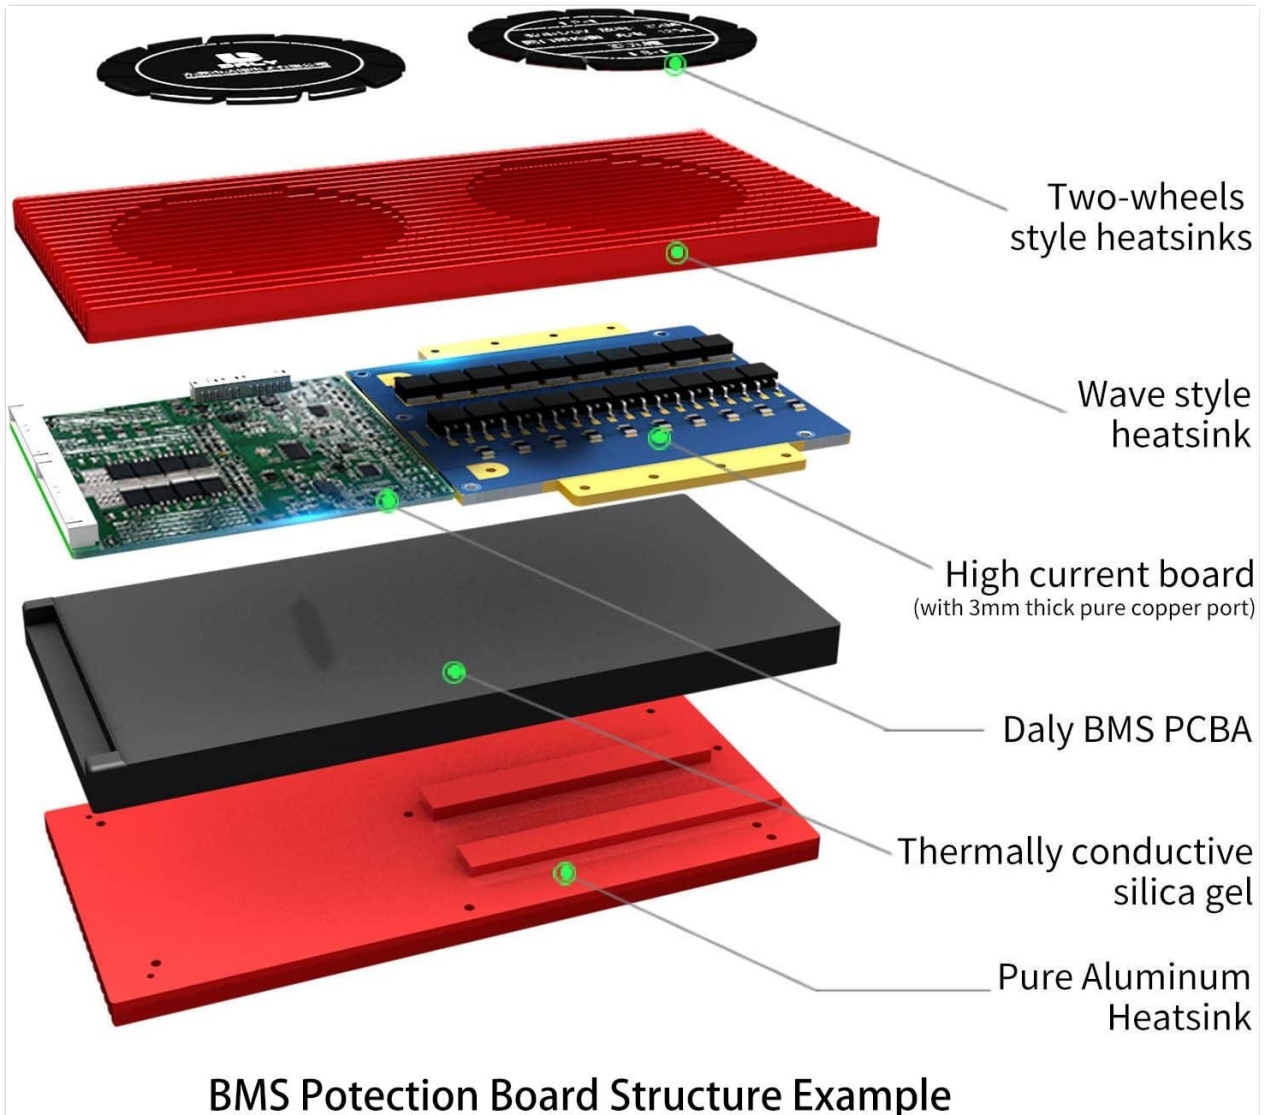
Exploded view illustrating the internal structure and components of the DALY BMS, highlighting its robust design.
